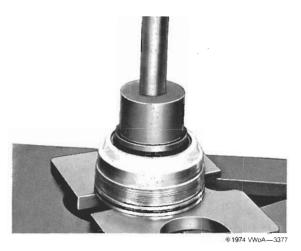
Oil seal being pressed out. The inner side of the side cover or adjusting ring should be up.
